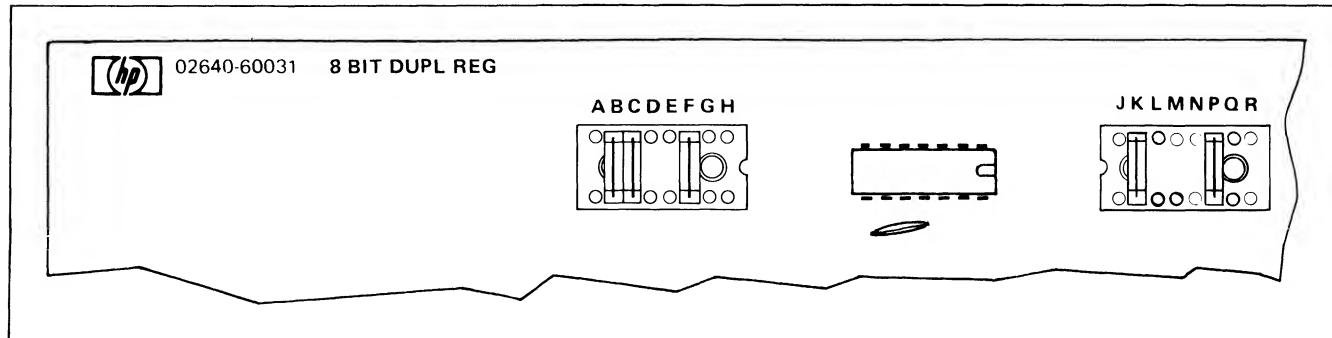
Terminal Duplex Register PCA Jumper Configuration
